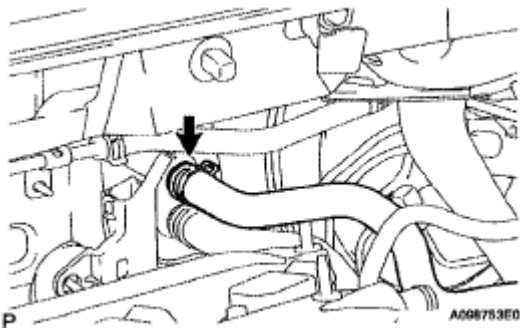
Locating Heater Water Inlet Hose From Booster Vacuum Tube
